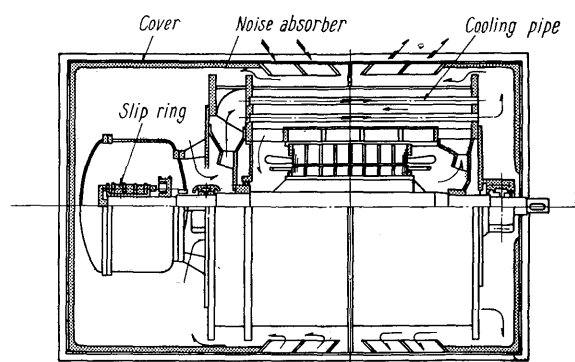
Section of pipe-cooled totally-enclosed type motor
